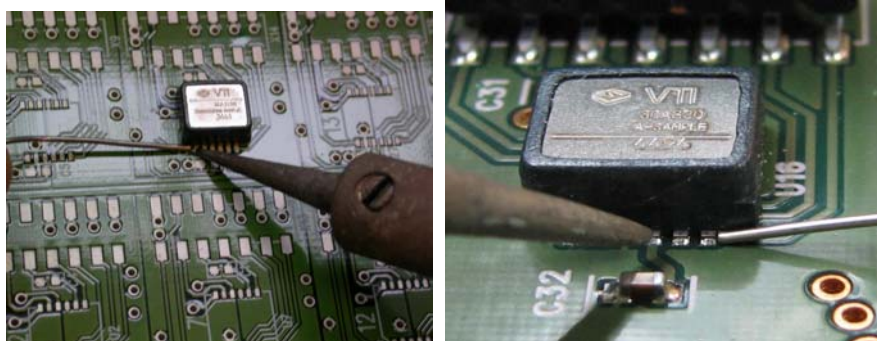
Recommended PWB land pad lengthening for hand soldering.
